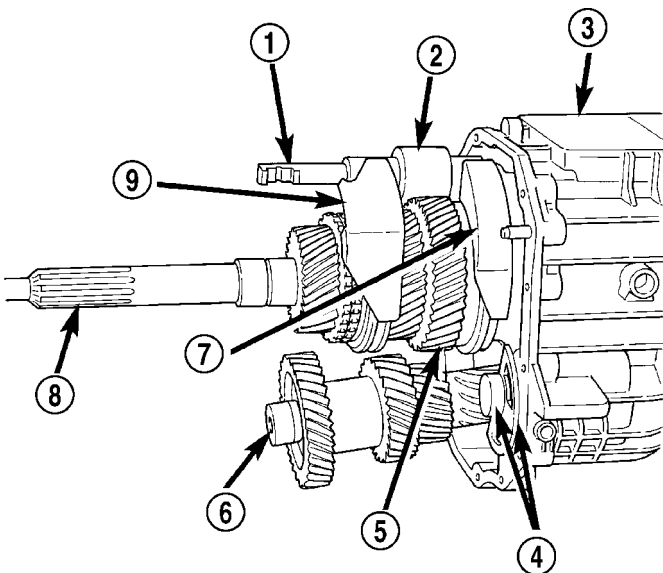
GEARTRAIN AND SHIFT COMPONENT
